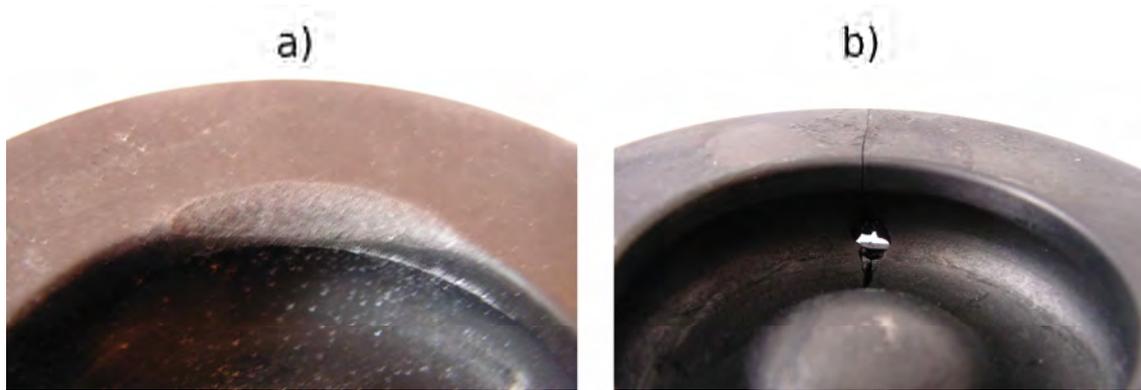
Examples of failures typical for pistons of modern diesel engines: a) erosion of piston crown acted directly by burning spray of fuel , b) perforation and rupture of piston crown
